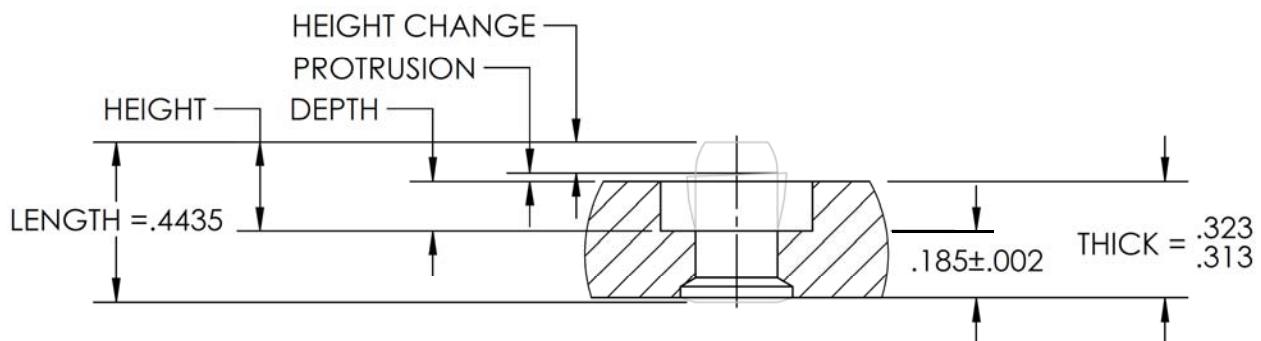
Cross-section of hole in thickest coupon. Dimensions in inches. Rivet outlined in gray before and after formation.
